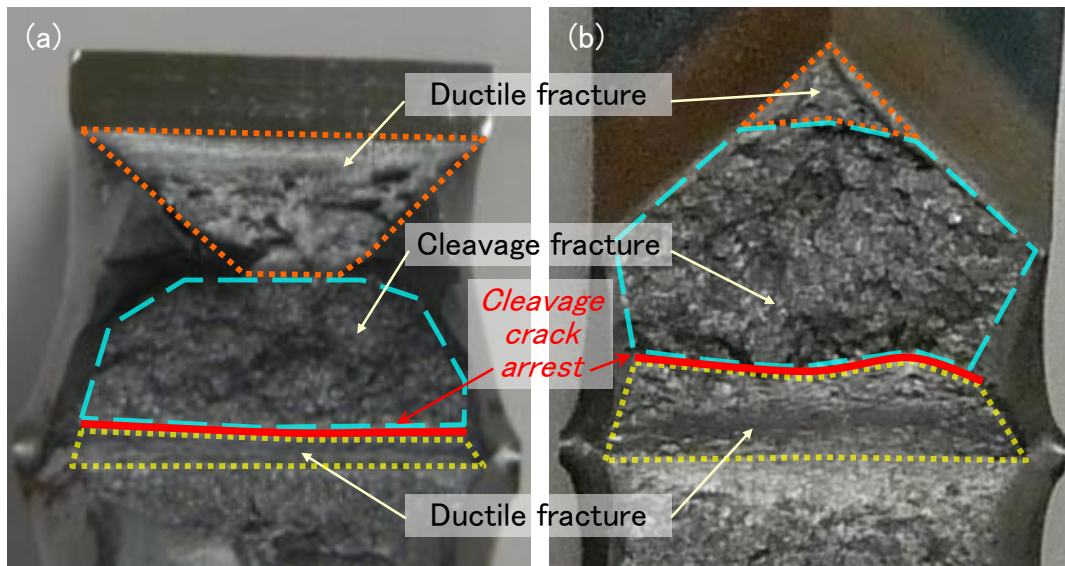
Examples of fracture surface of (a) V-notch and (b) chevron-notch Charpy specimens obtained from 0.09%C-0.1%Si-1.6%Mn steel plates rolled at 850 °C and tested at -100 °C.
